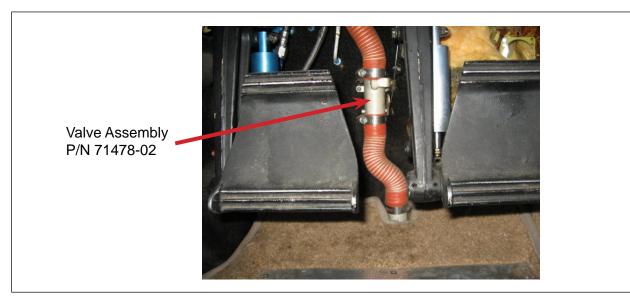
Valve Assembly P/N 71478-02 (Remove if installed)
